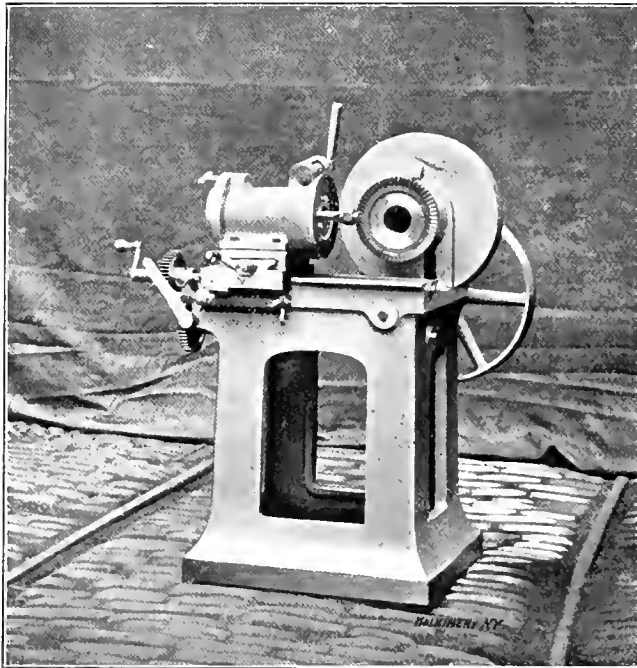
Nut Milling Machine, Joseph Whitworth & Co. (1866)
